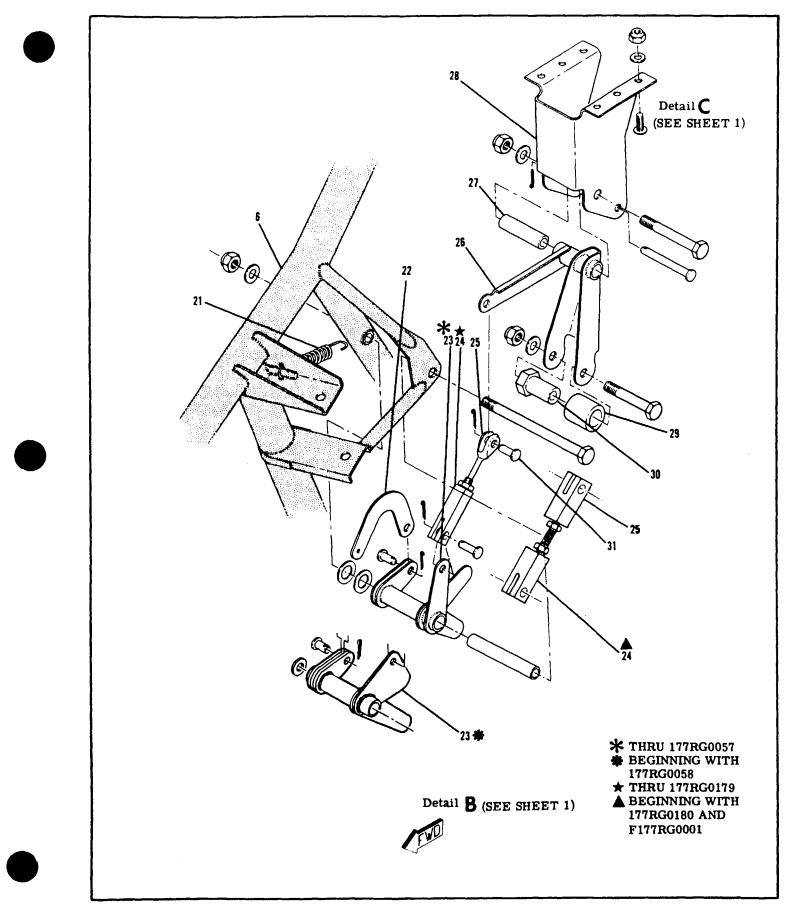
Nose Gear Rigging (Sheet 3 of 7)
